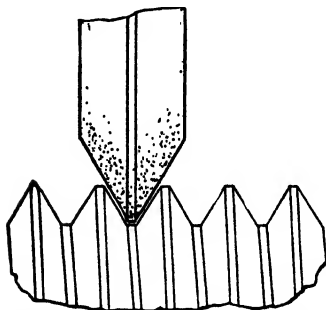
Thread grinding. (*The Socony-Vacuum Oil Company*)
